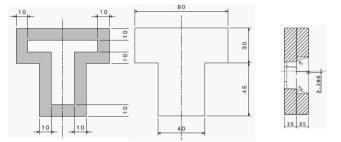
(a) Dimensions of T-shaped pocket and pocket angles
